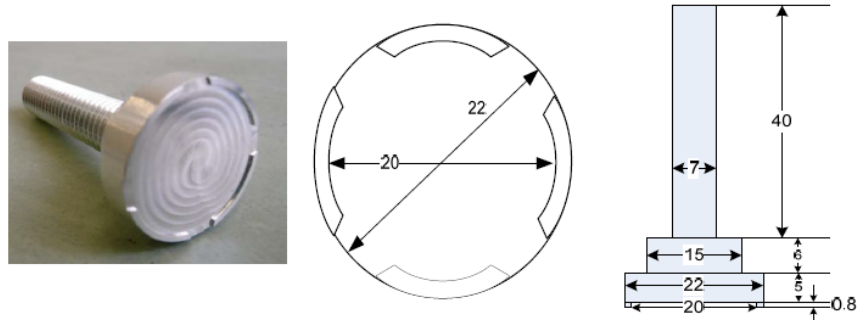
Pull-out stub for the Asphalt Bond Strength Test (ABS) (all measurements are in mm) (47).
